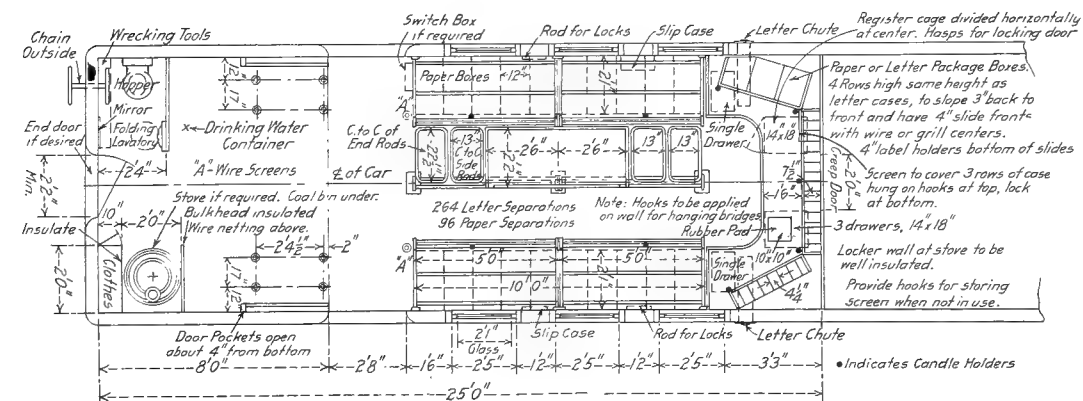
Floor Plans Showing U. S. Government Requirements for 25 ft. Mail Apartment.
